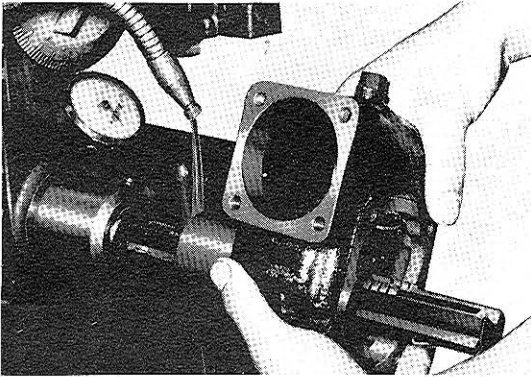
Honing Sector V5006 Shaft Bushing
